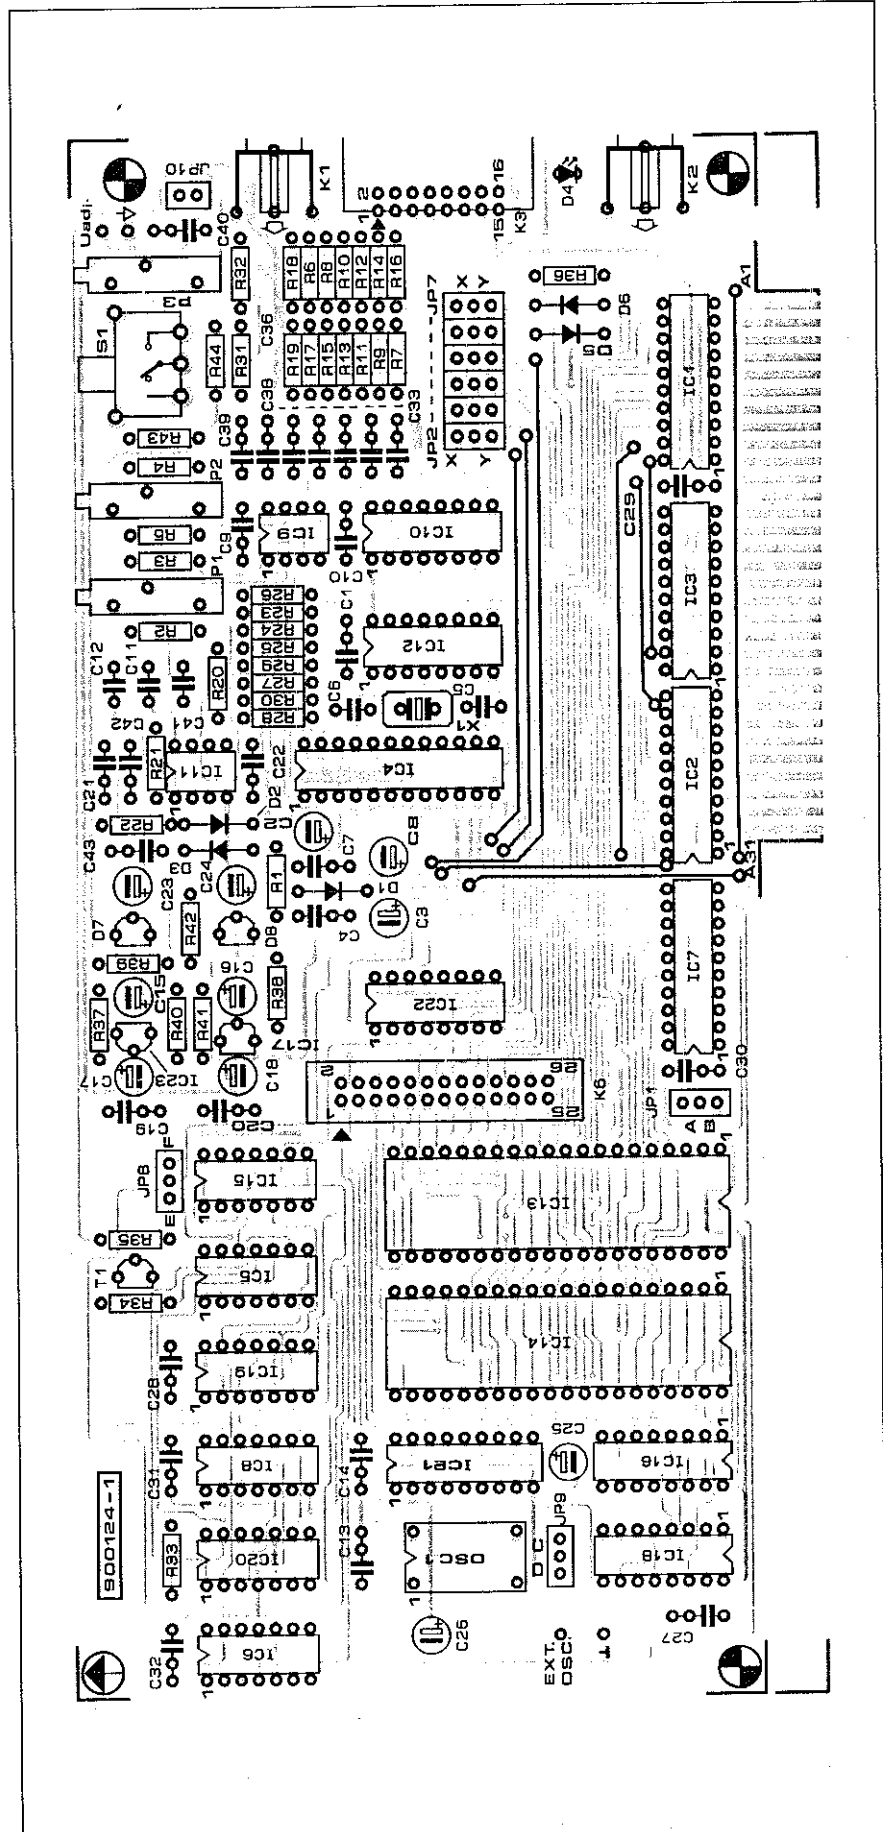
Component overlay of the double-sided, through-plated printed circuit board
